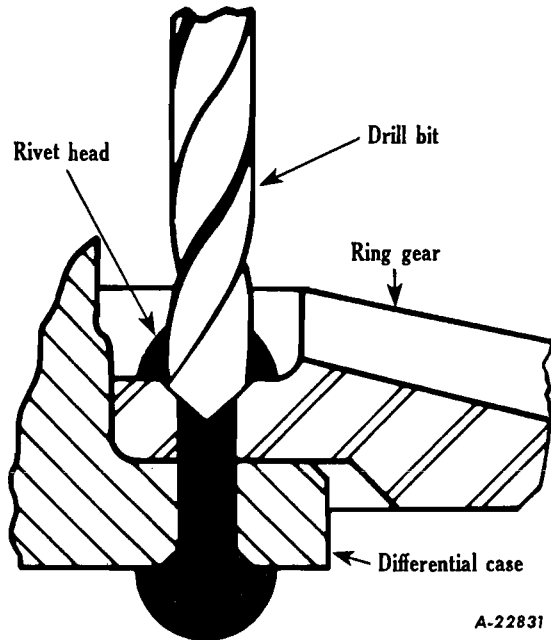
Drill rivet head and punch-out rivet as shown.
